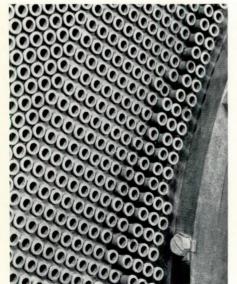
Details of heat exchanger tube defects in 1,000-kW. gas turbo alternator
